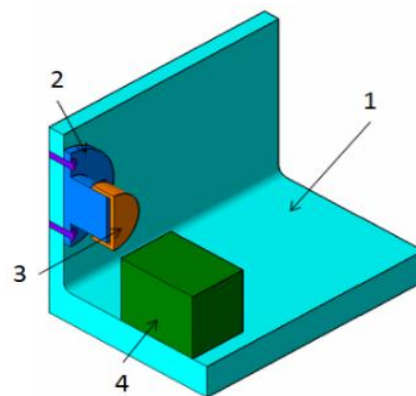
Cutaway of 4 part assembly subset with 4 attachments
